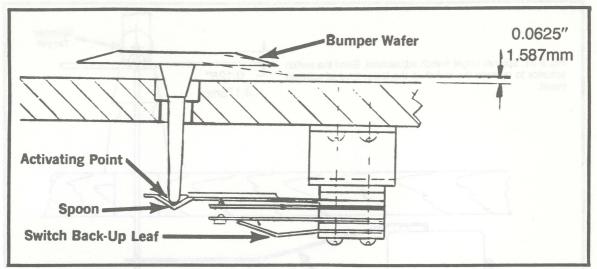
Thumper bumper switch adjustment. First center the switch spoon. Then bend the switch actuator to operate the switch within the specifications shown.
